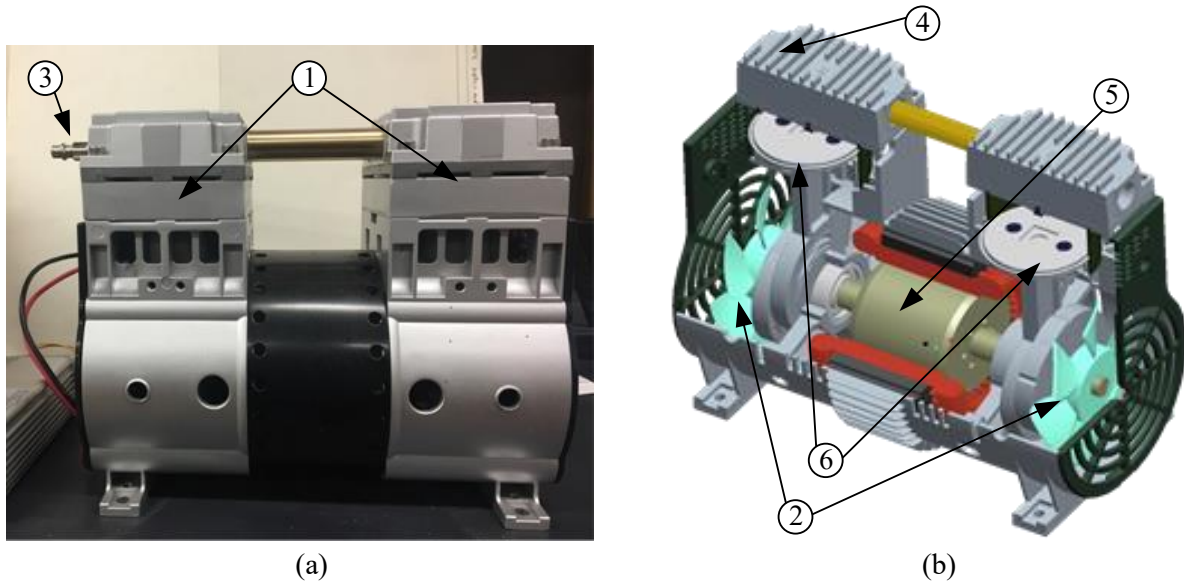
Designed air-compressor: (a) Manufactured air compressor, (b) 3D drawing model: (1) Two cylinders, (2) Two cooling fans, (3) Inlet port, (4) The outlet port side, (5) Air-compressor motor, (6) Two pistons.
